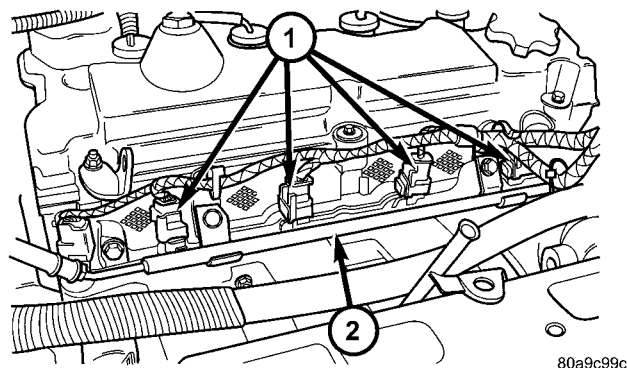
FUEL RAIL AND INJECTORS 2.4L
